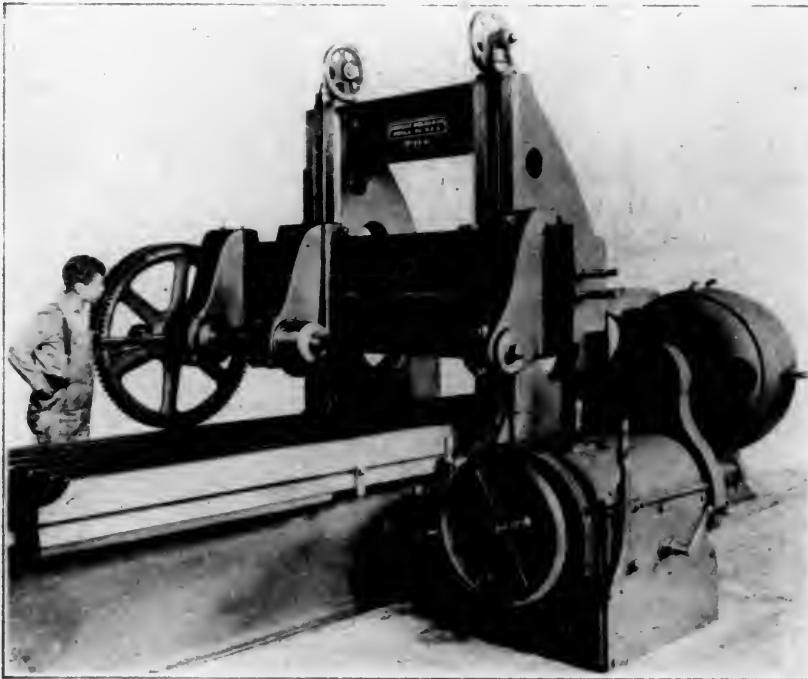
VARIABLE-SPEED MOTOR DRIVE, USING GEAR MECHANISM, FOR BEMENT, MILES & CO., SLAB MILLING MACHINE.—CROCKER-WHEELER MOTOR.
